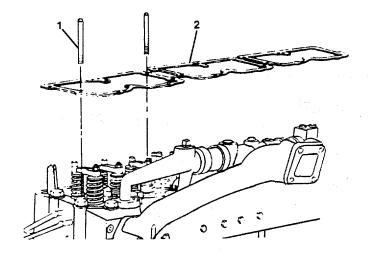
Rocker Housing Gaskets and Guide Studs.
